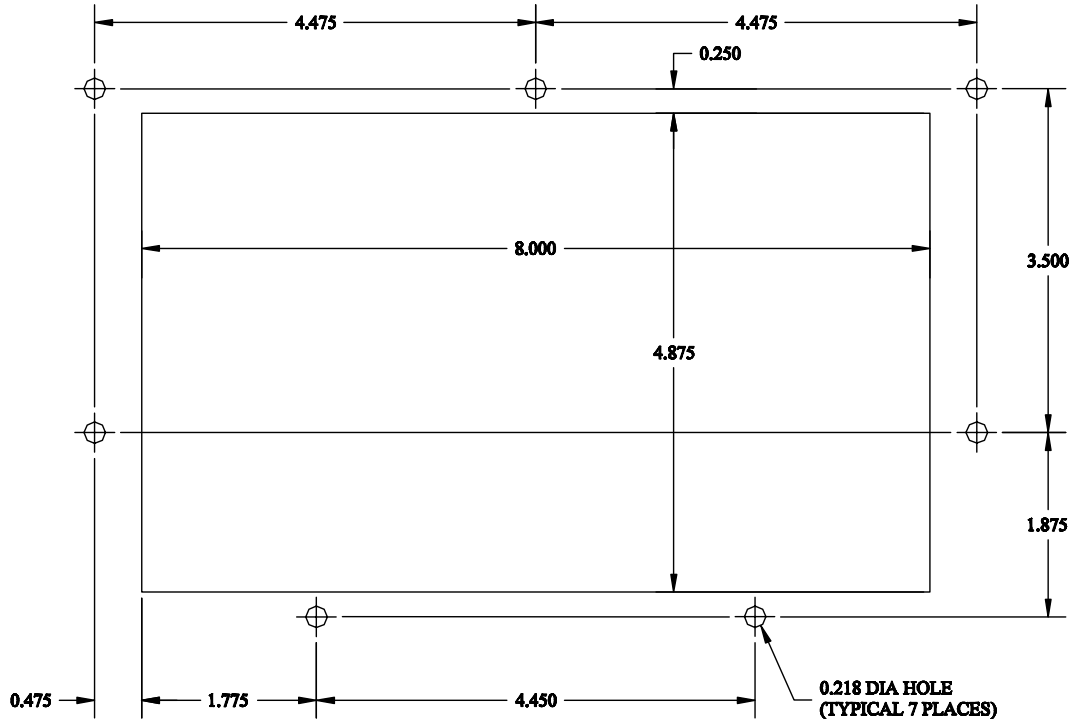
D4591 Keypad/Display Recommended Panel Cut-out
